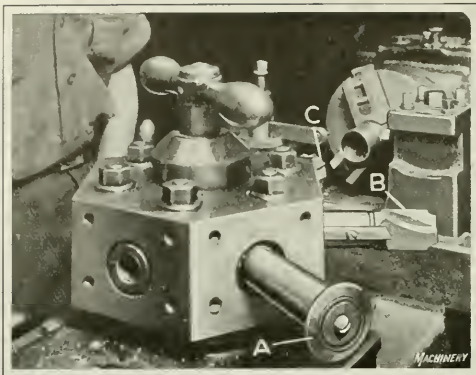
Turret Lathe used in making Sockets for Vacuum Tubes
